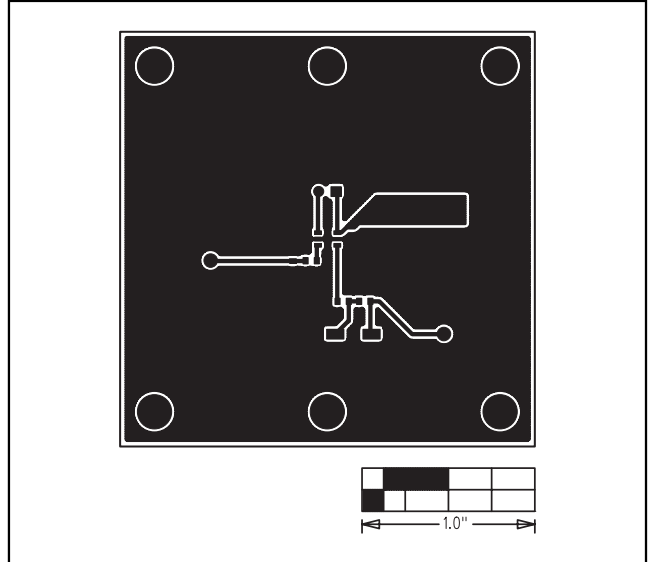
MAX9586 EV Kit PCB Layout—Component Side
